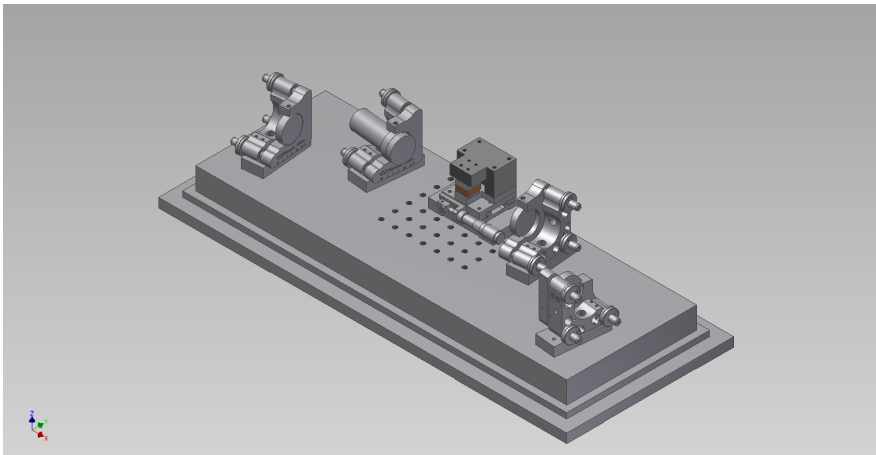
View of the isometric perspective of the schematic CAD drawing of the complete bow-tie resonator designed with Autodesk Inventor.
